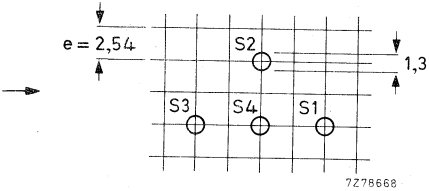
Hole pattern for mounting on a printed-wiring board (solder side).
